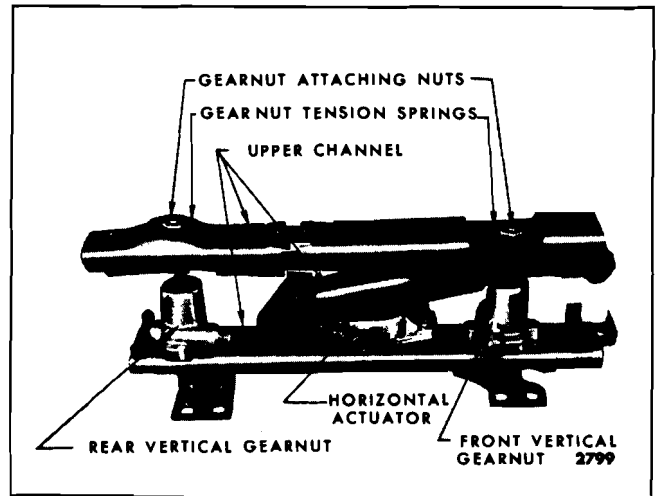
Six-Way Seat Adjuster - "B, C & E" Styles
